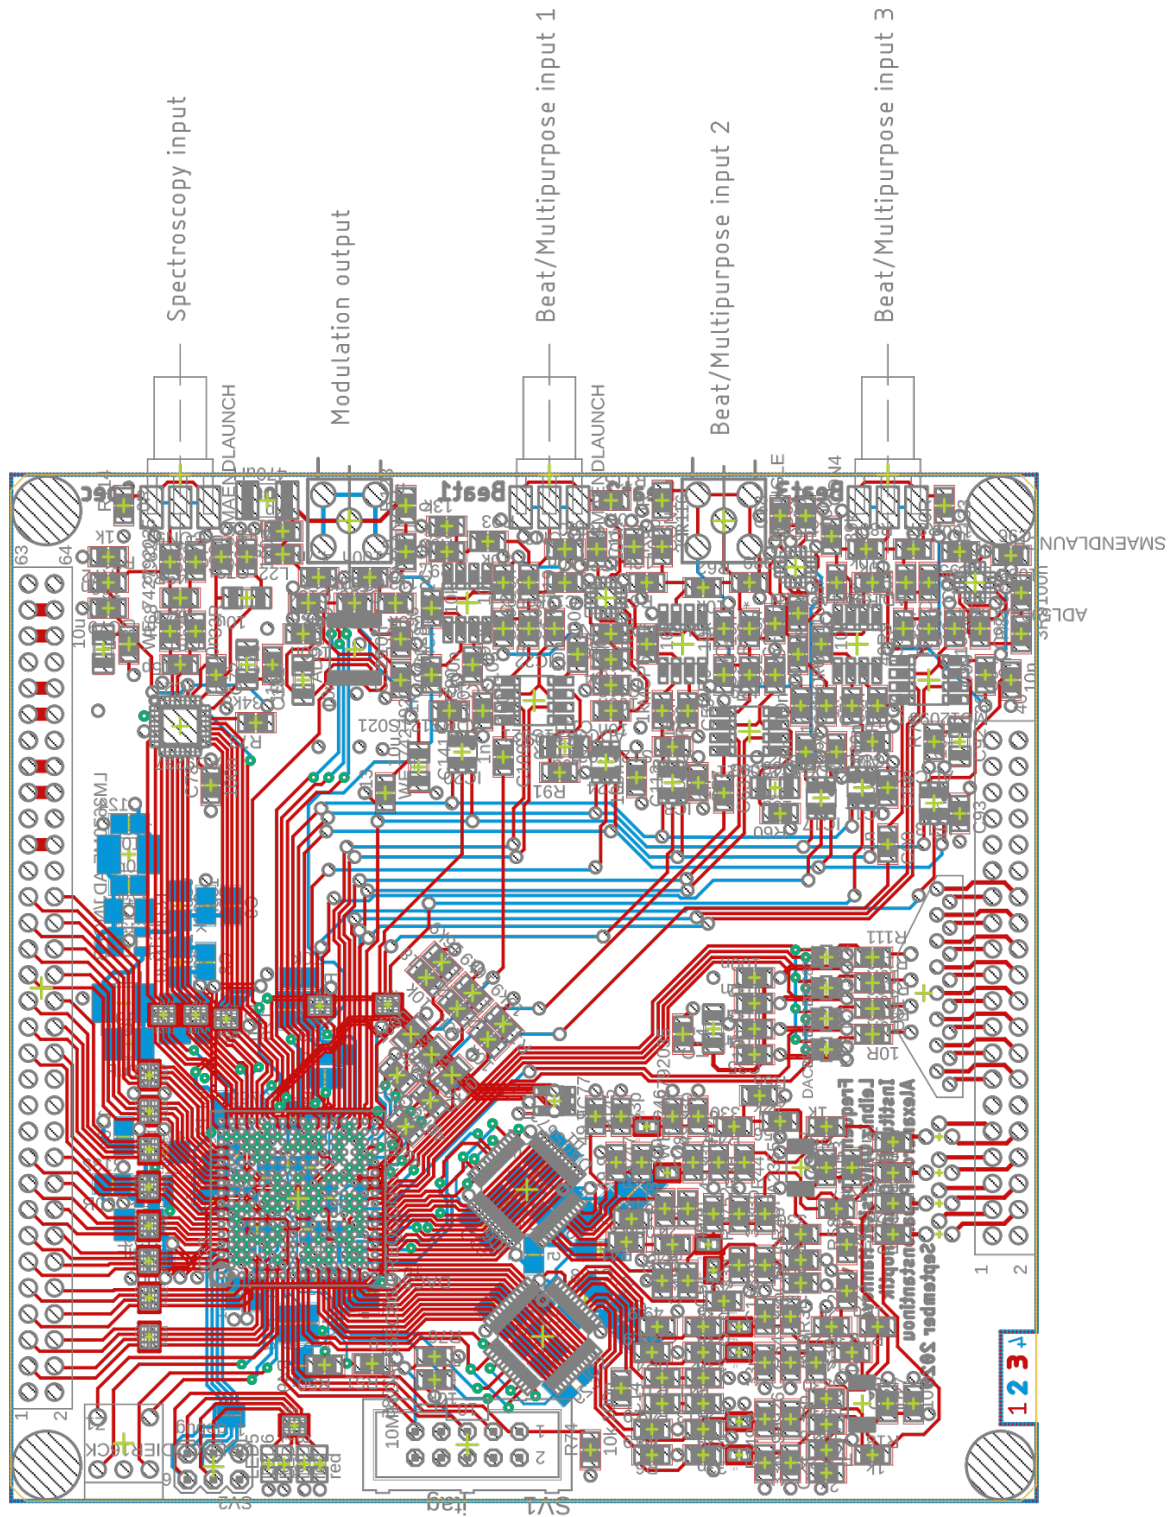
Illustration of the PCB layout of the laser frequency control board.
